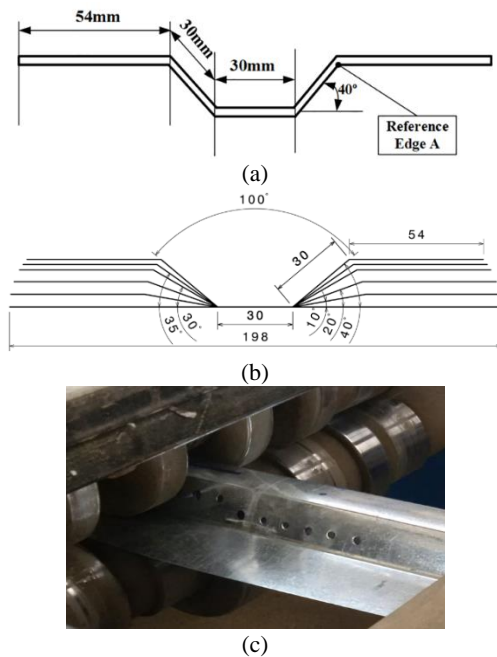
a) Dimensions of final shape b) flower pattern of roll forming c) the sample of roll forming in 5th stage
